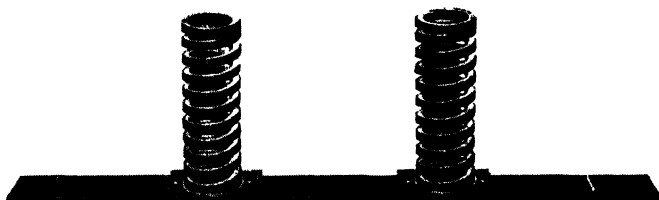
SPRING BUFFERS MOUNTED ON FIXING PLATE
